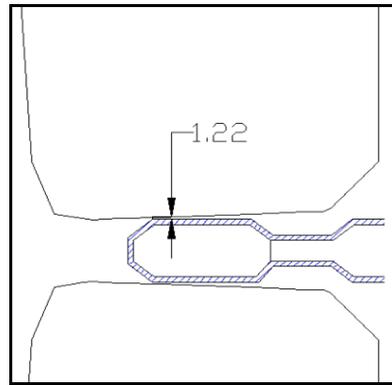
Vacuum Chamber minimum clearance (cm) in the Dipole.
